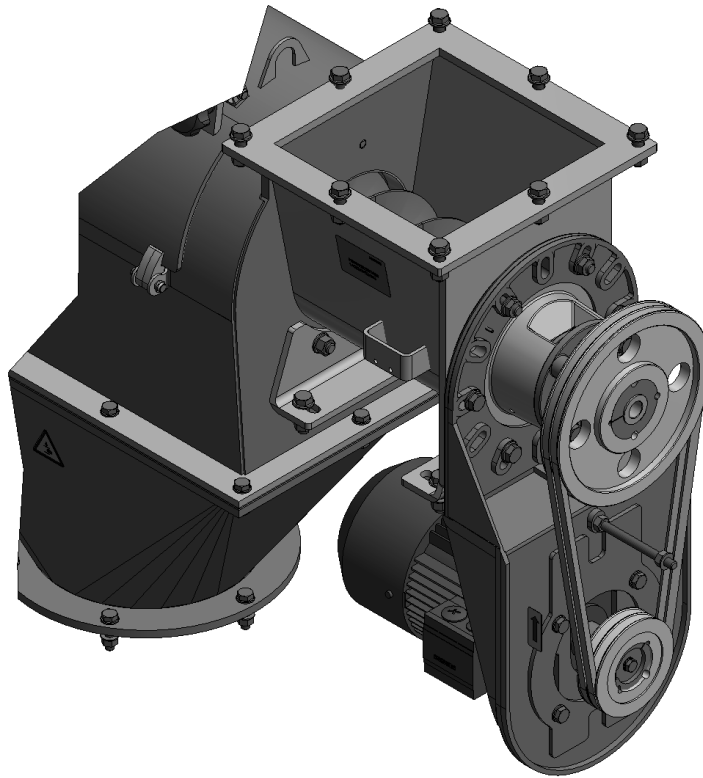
Bearing housing (drive side): Bearing housing without protective plate
